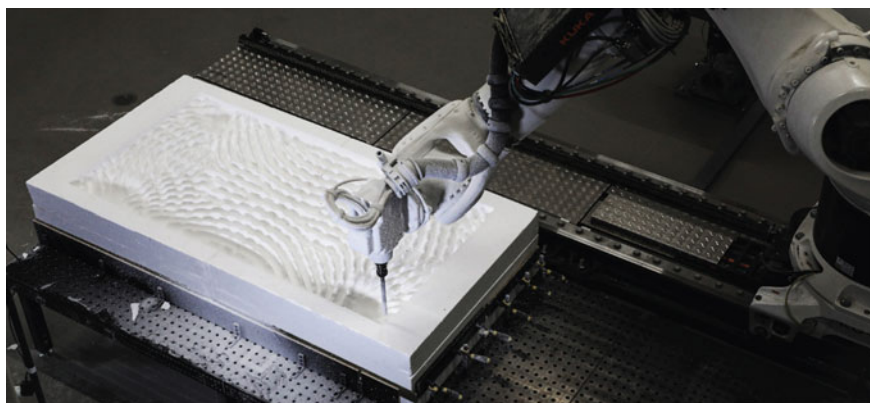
Robotic milling of the styrofoam formworks for RD Slab 01
